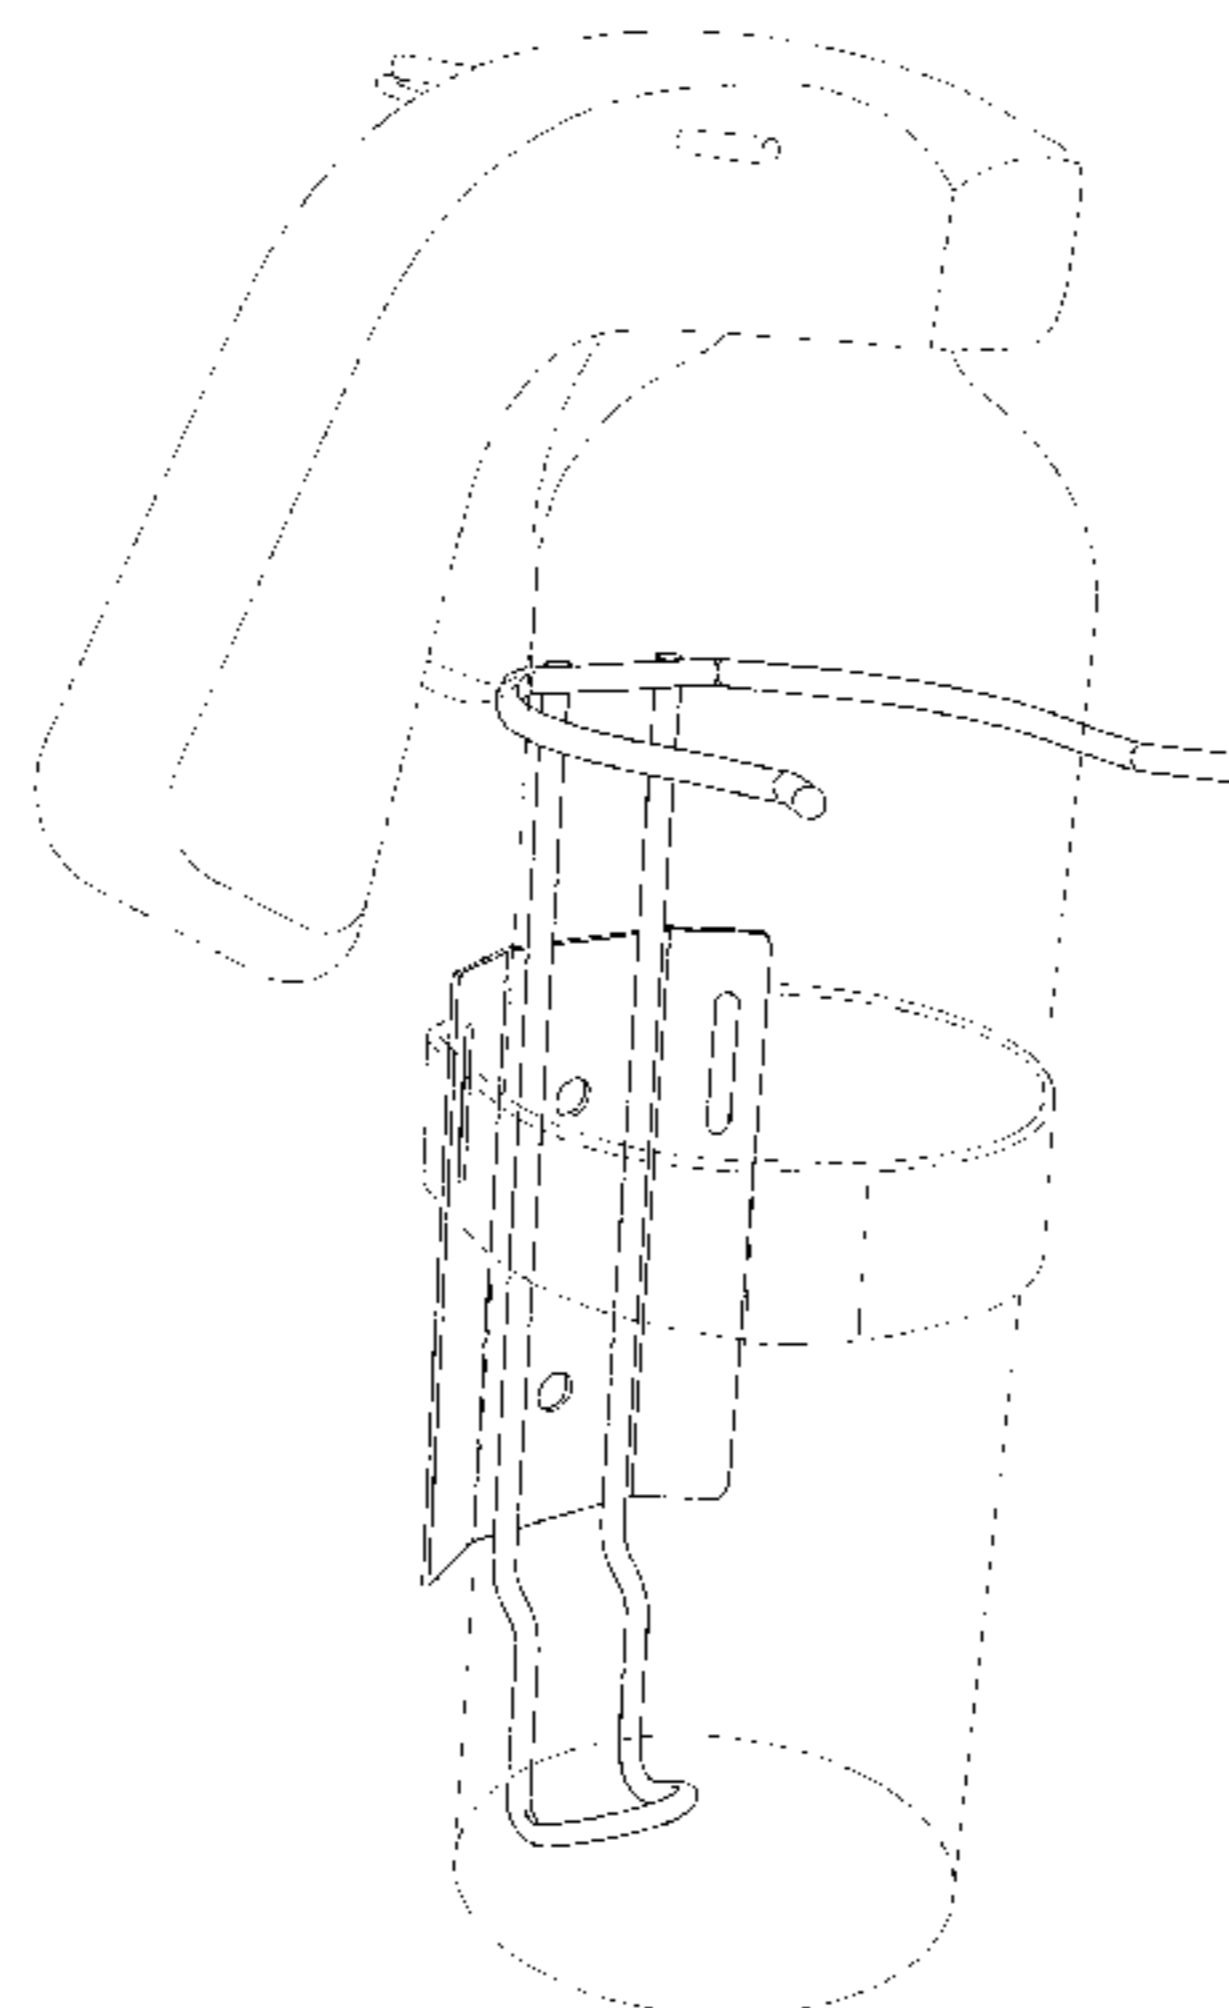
is a left side view of the mounting bracket for a fire extinguisher of FIG. 8.
